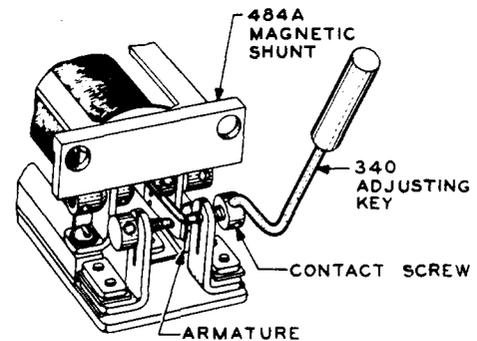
Method of Adjusting for Total Contact Travel — 215-Type Relay
